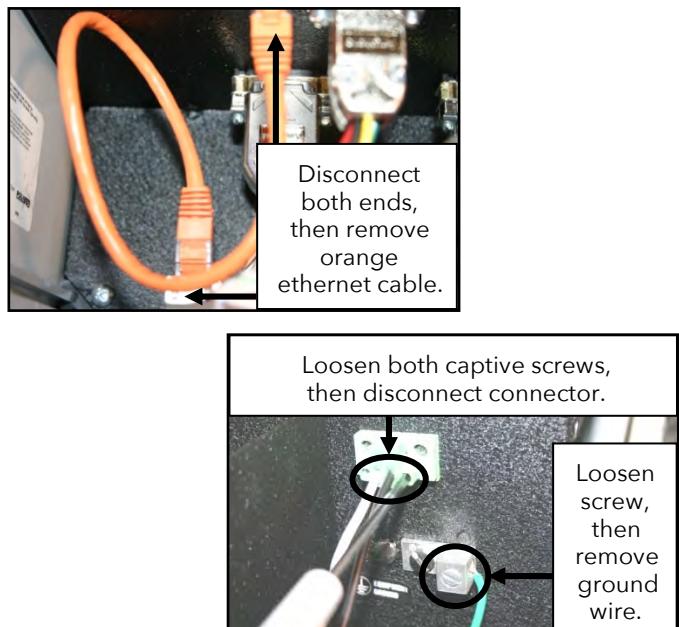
DISCONNECTING THE ETHERNET CABLE, THE POWER CABLE CONNECTOR, AND THE GROUND WIRE.
